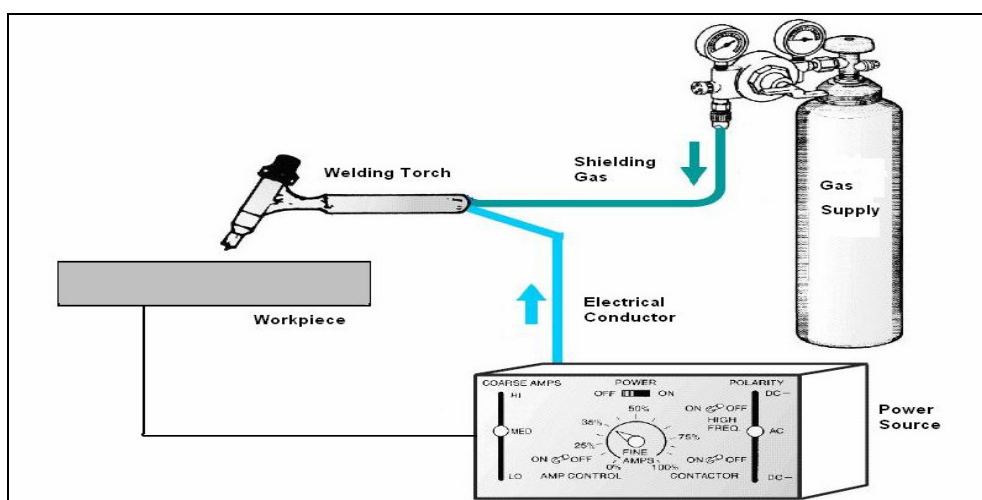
Typical Equipment Used for Gas Tungsten Arc Welding. [2]
